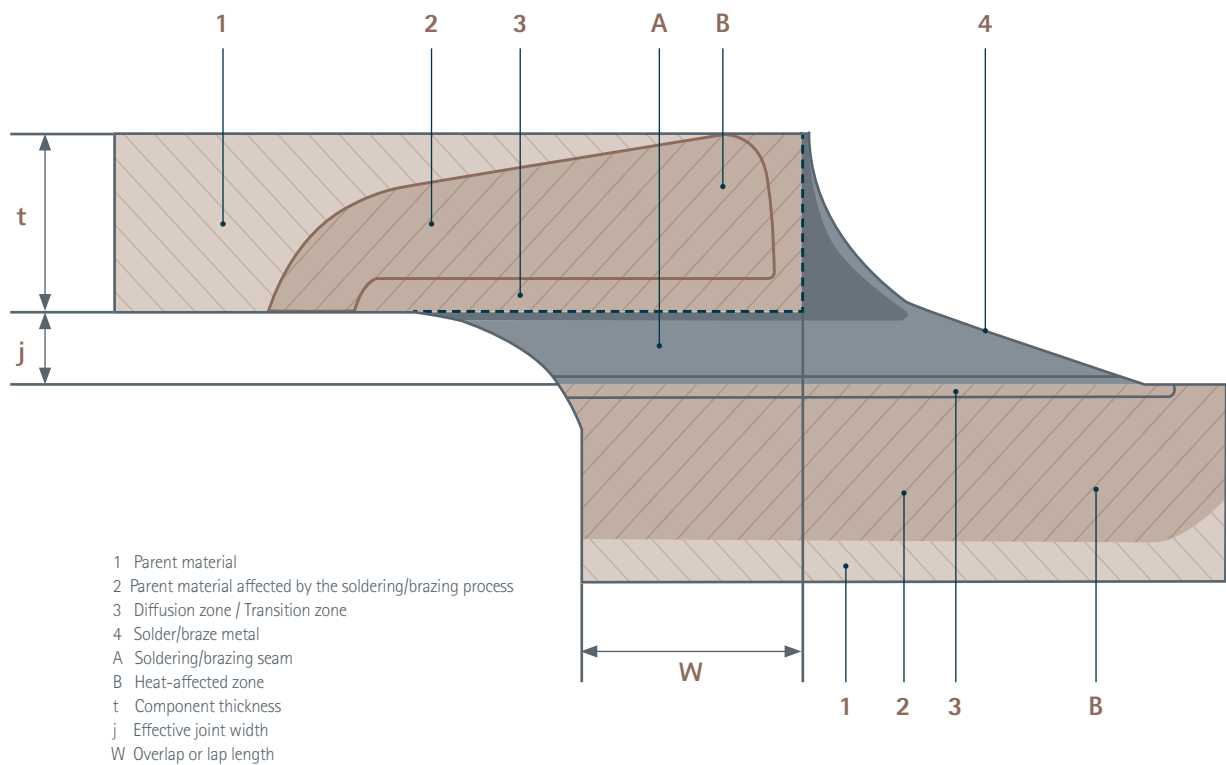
Schematic diagram of a soldered/brazed joint [10]
